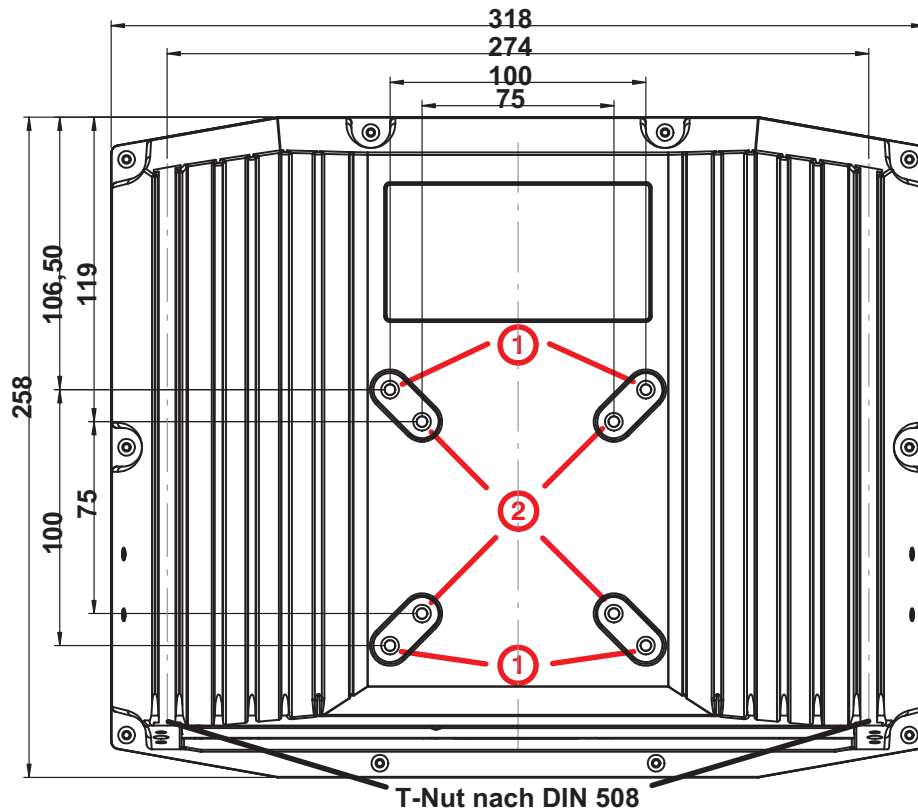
Back, C12 enclosure (all dimensions in mm)
